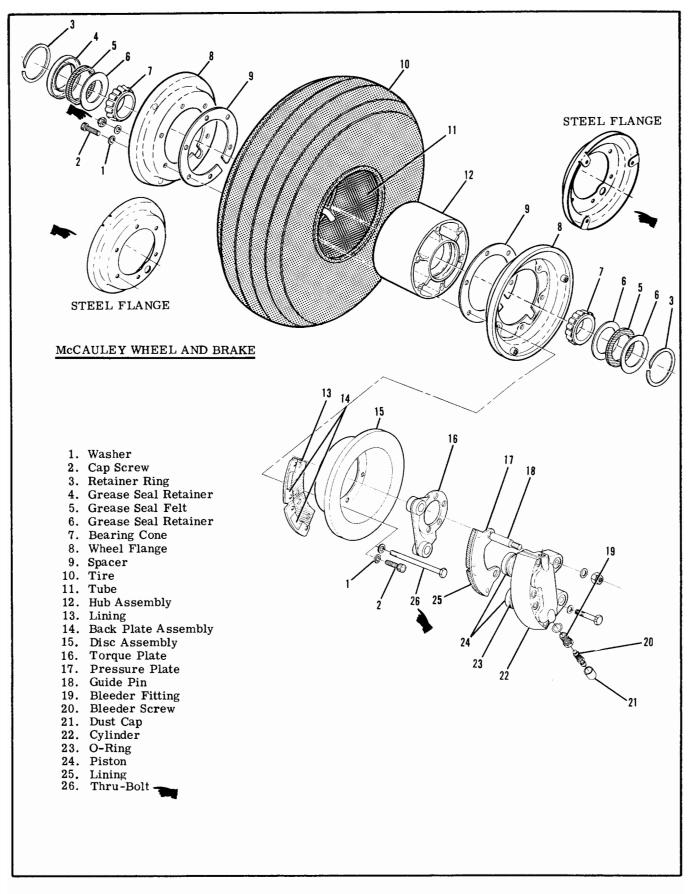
Wheels and Brakes (Sheet 2 of 2)
